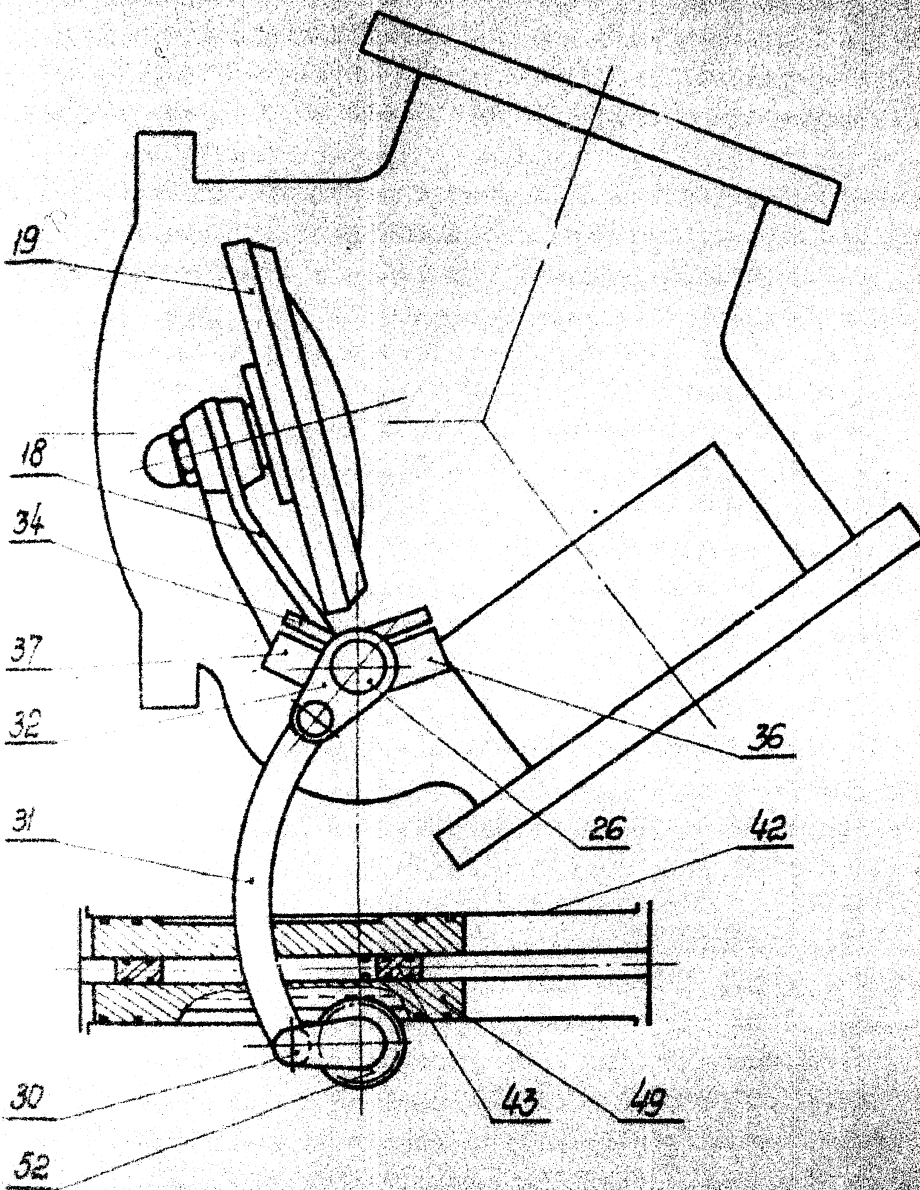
CONTROL GEARING MECHANISM OF INNER FLAP
